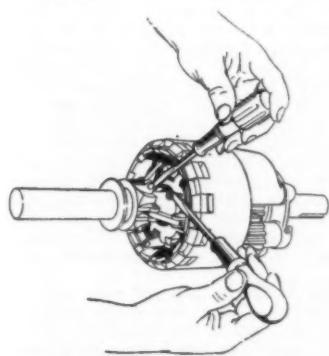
To make the adjustment, merely pull out the adjusting pin and turn the toggles until the pin slips into the next notch.
